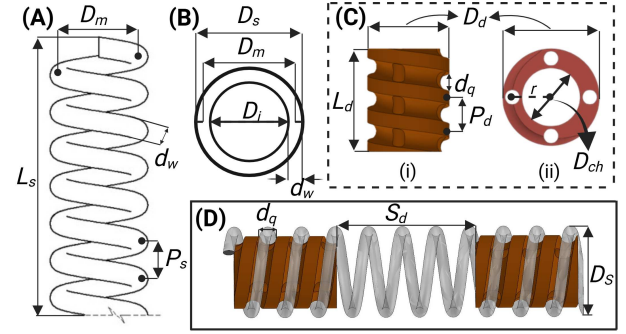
The key geometric parameters defining the robot's spring-and-disk backbone. (A) Side view of the helical spring. (B) Top view defining the spring diameters. (C) The custom 3D-printed spacer disk in (i) side and (ii) top views. (D) An assembled view demonstrating the inter-disk spacing (S_d).
